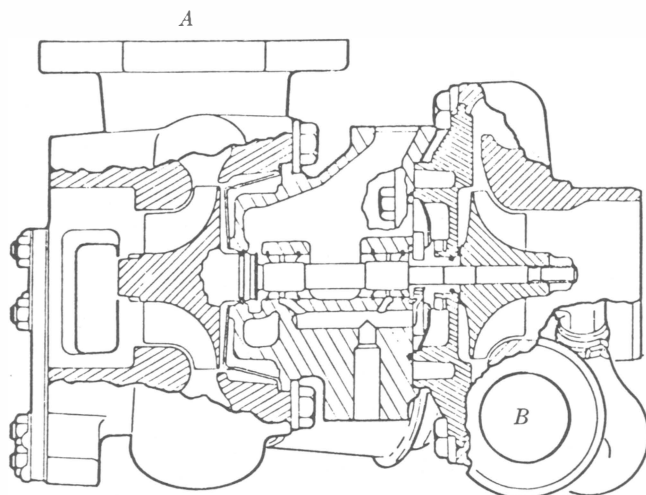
Cross-sectional view of turbosupercharger for engine of fig 13-5. (A) Exhaust inlet; (B) compressor outlet.
